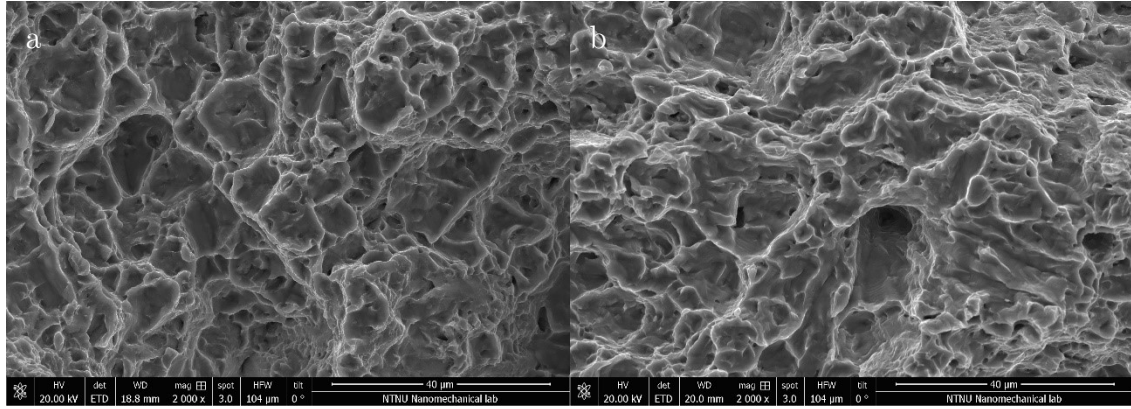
(a) W1015-FC and (b) LENS detail of the center of fracture surface
